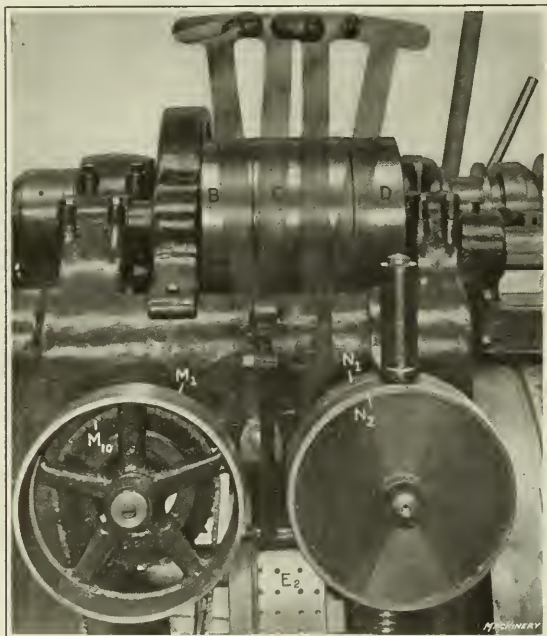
Rear View, showing Drive for Main Cam-shaft and Indexing Mechanism
